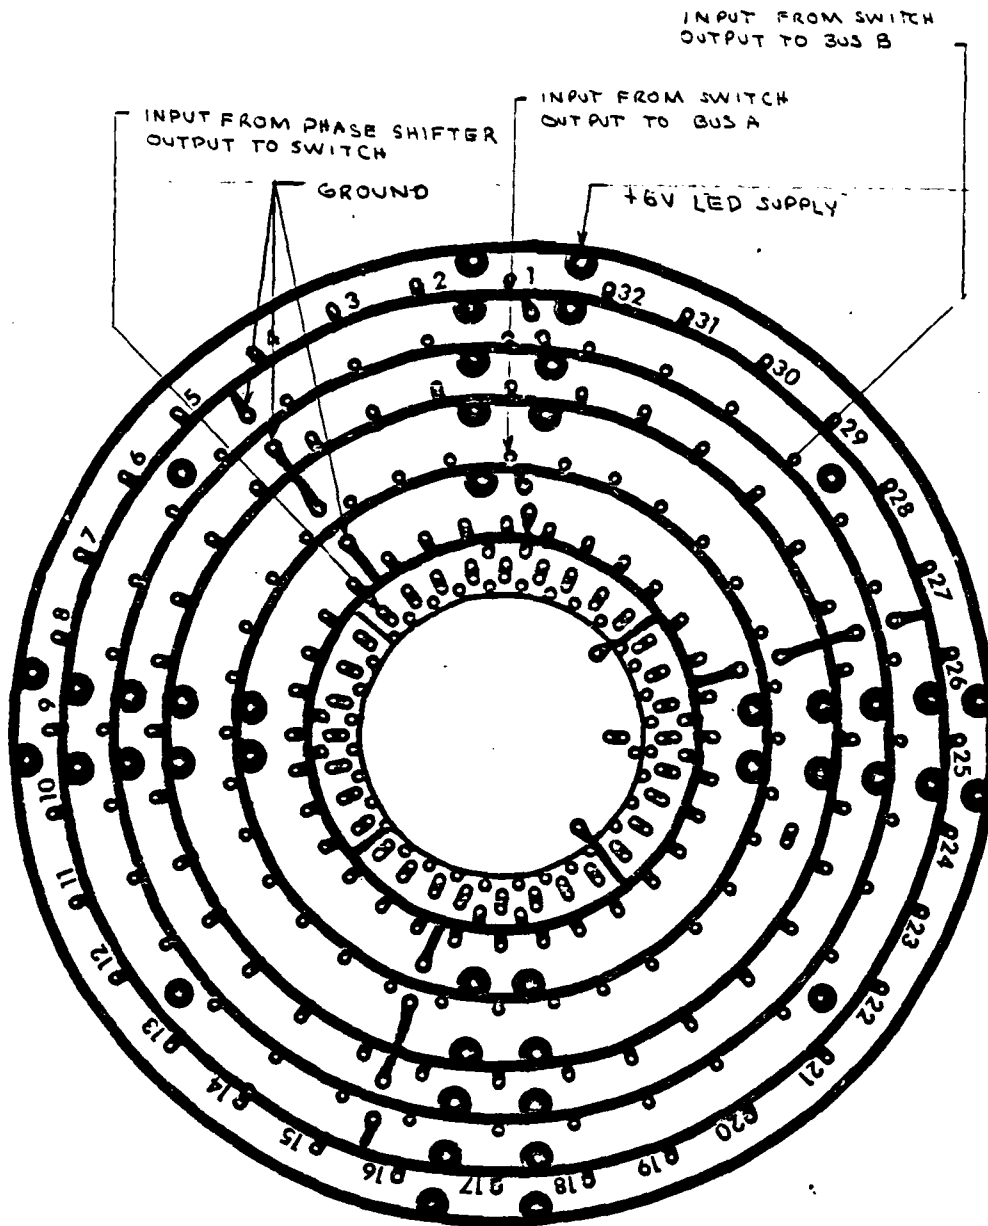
CIRCULAR PRINTED CIRCUIT BOARD
